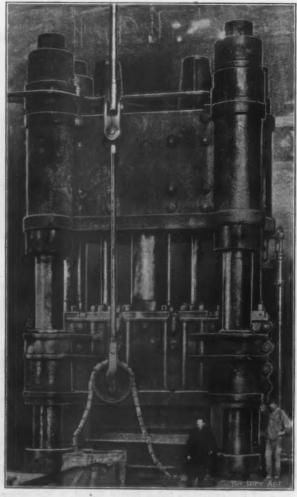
Steam Hydraulic Armor Plate Forging Press with a Pressing Capacity of 12,000 tons.
